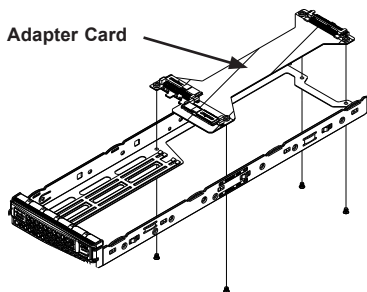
Installing the Adapter Board into the Hard Drive Carrier
